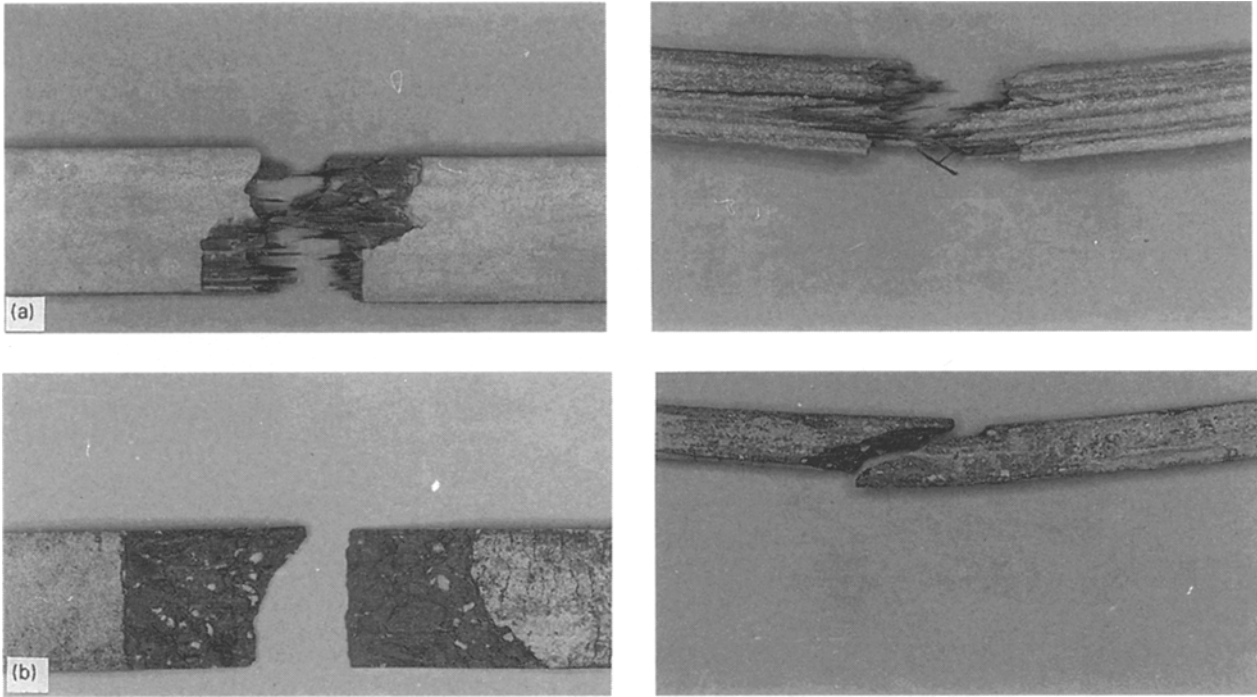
Macro view of fracture surfaces of HC samples sintered at (a) 750 °C and (b) 1400 °C. Specimen width is 10 mm in all cases.
